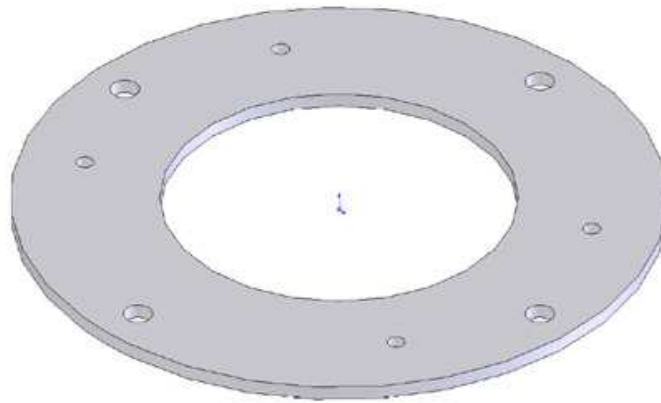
Insulator connection ring to be used to fix the lower high voltage terminal and the roller support system. Dimensions are shown on technical drawings and given in appendix B with Part number 6
